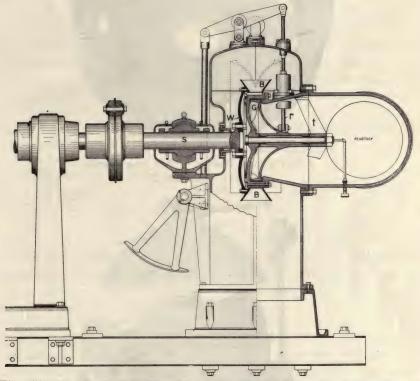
Longitudinal Section Girard Impulse Turbine. Platt Iron Works Company (see page 235).
